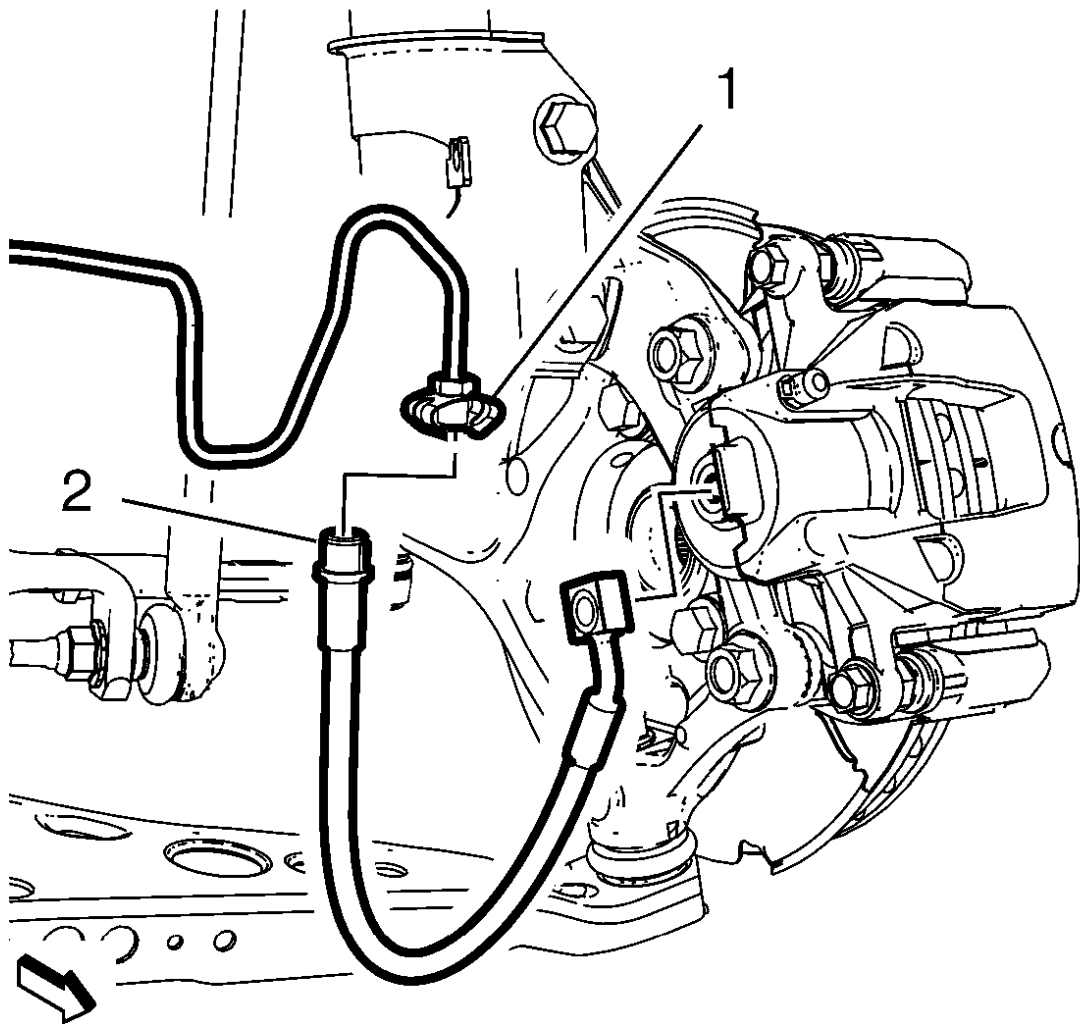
Front Brake Hose And Front Brake Pipe Fitting
